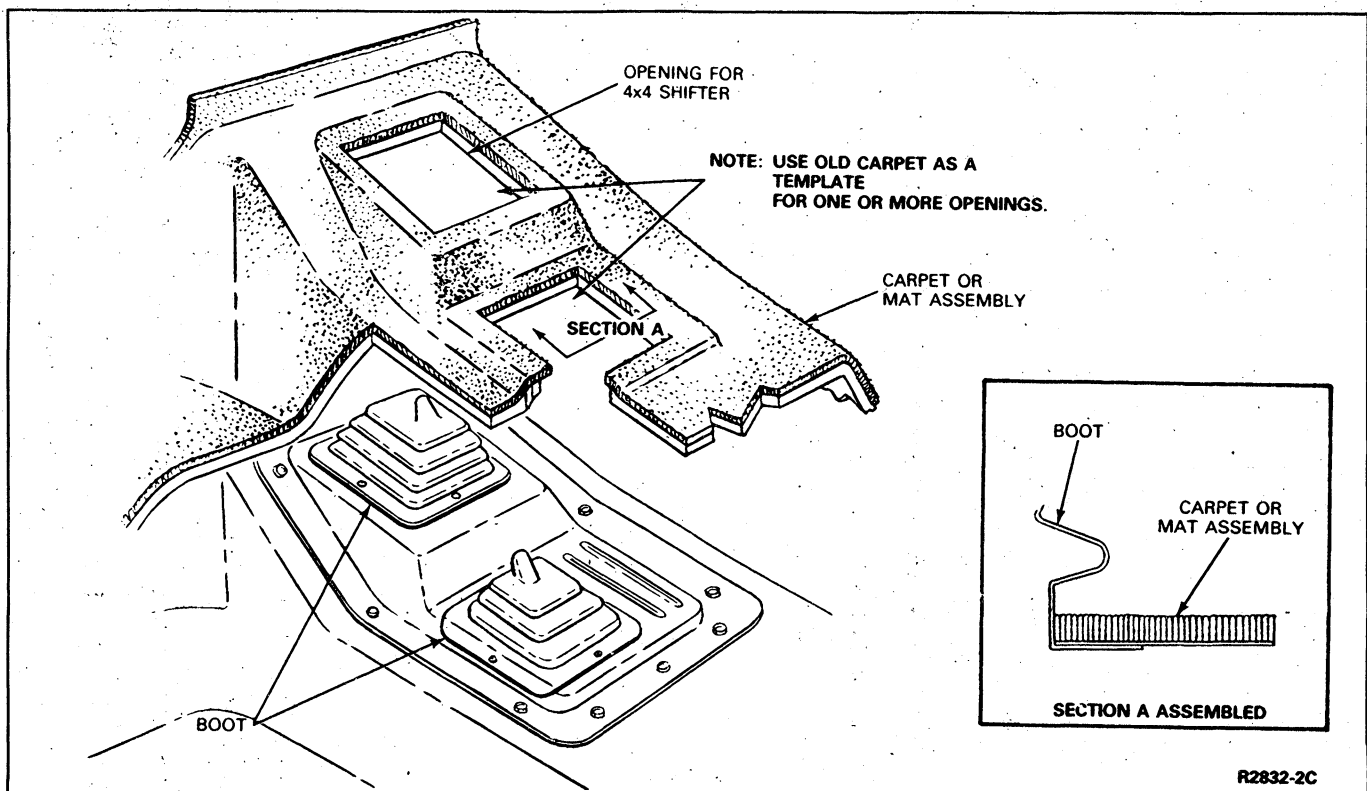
Floor Carpet Center Retainers—F-150—F-350, F-Super Duty and Bronco
